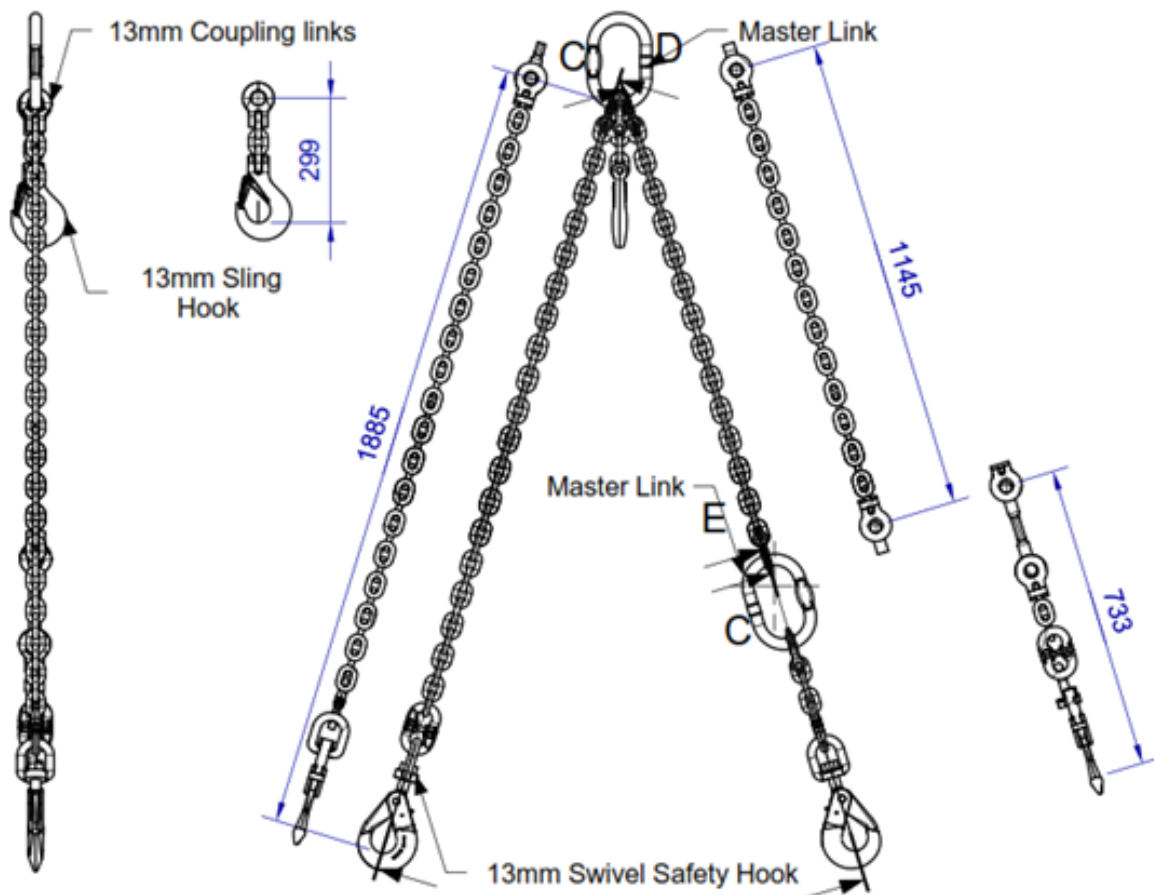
chain shown is Ancon EzyLay Chain set up & dimension
